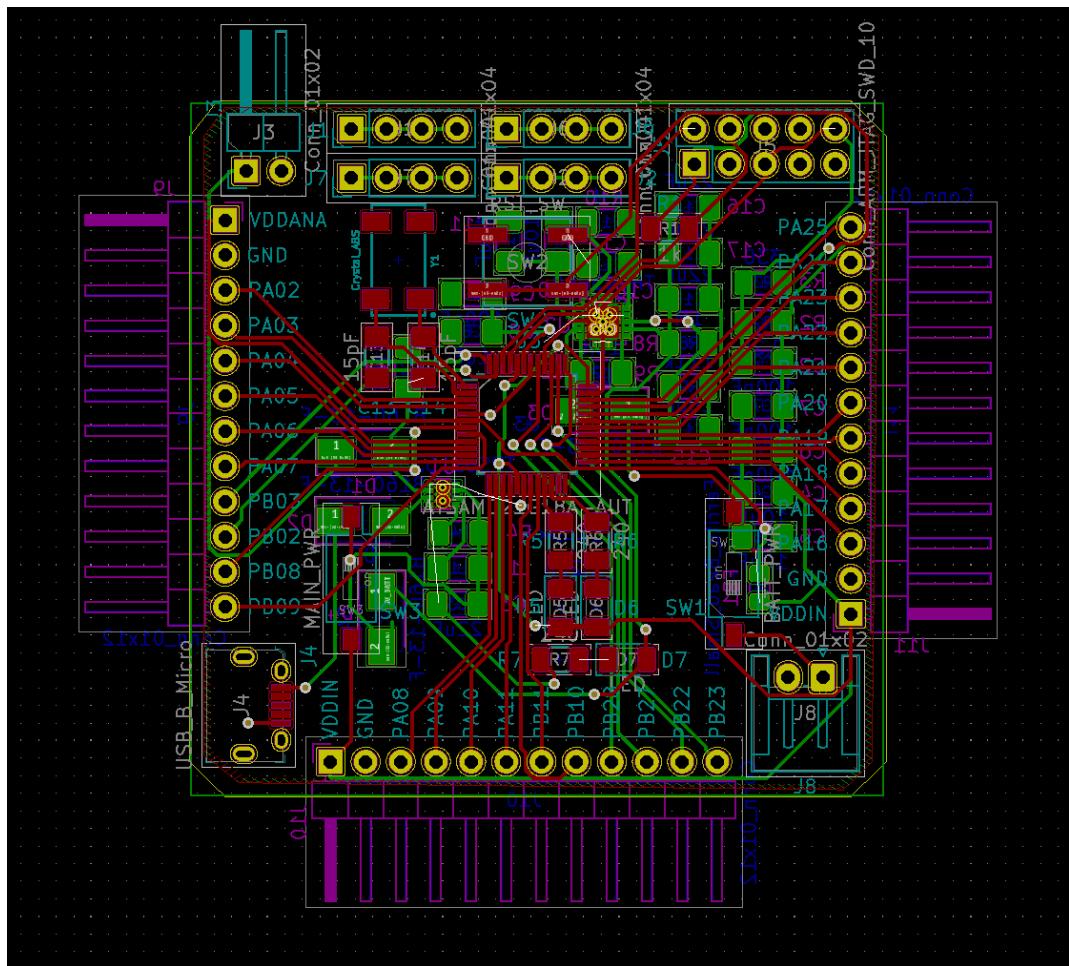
This is the KiCAD 2D layout of the board. It was designed in 2 layers.
